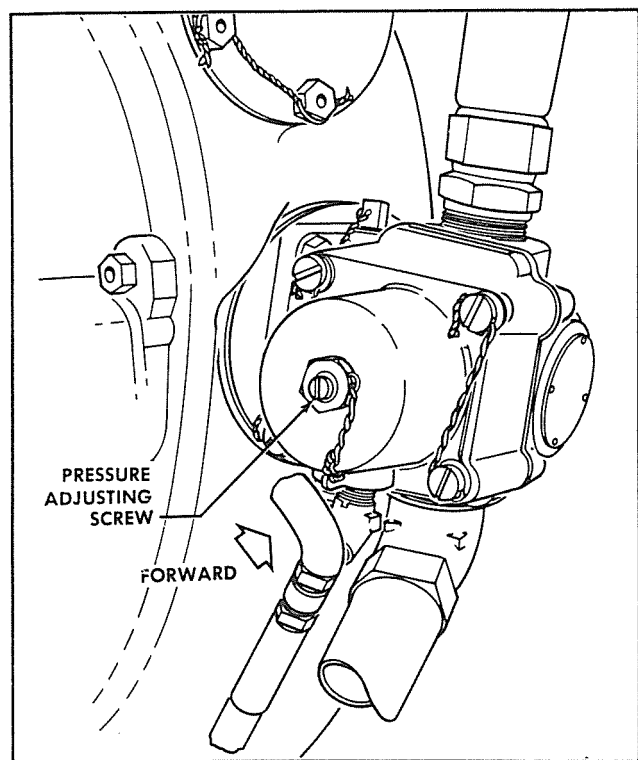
Engine-Driven Fuel Pump, Showing Pressure-Adjusting Screw
